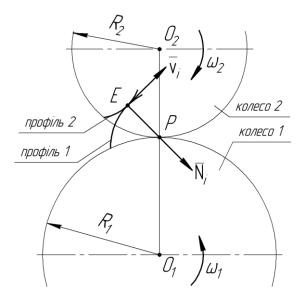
General chart of the planar gearing system *for two gear-wheels
